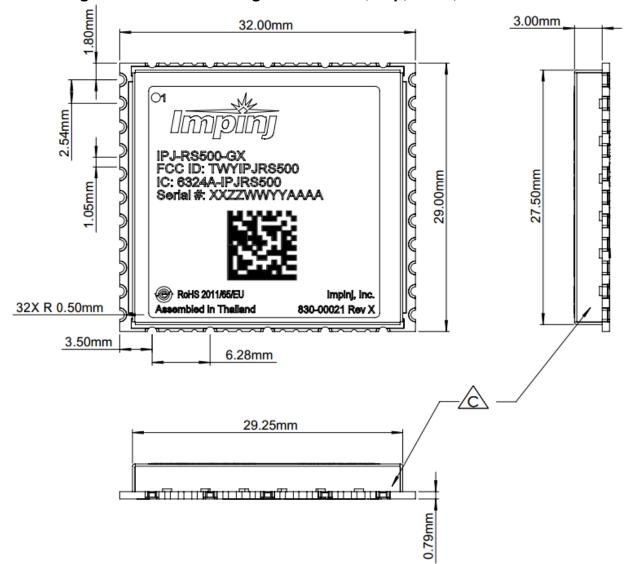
RS500 Package Dimensions, Top, Front, and Side Views
